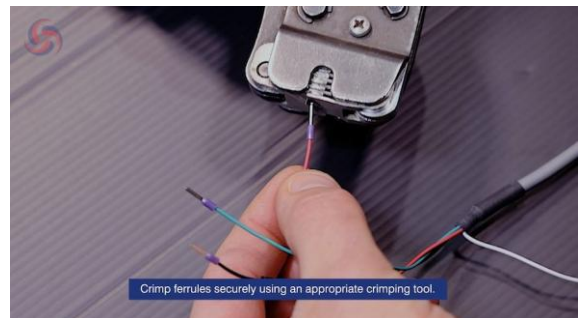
Crimping ferrules securely using an appropriate crimping tool.
